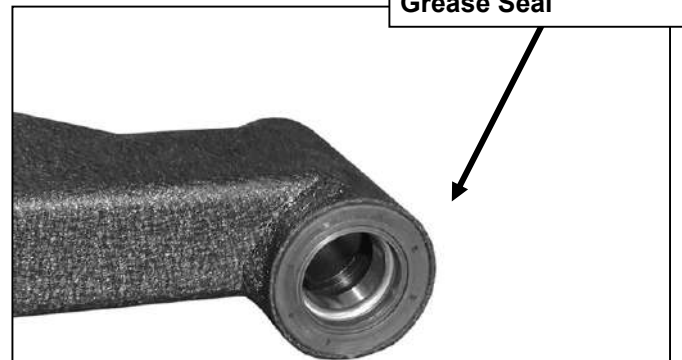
Insert Bearing Races into Swing Arm. Apply Grease to Lower Bearing. Insert Lower Bearing into Race. Install Grease Seal
